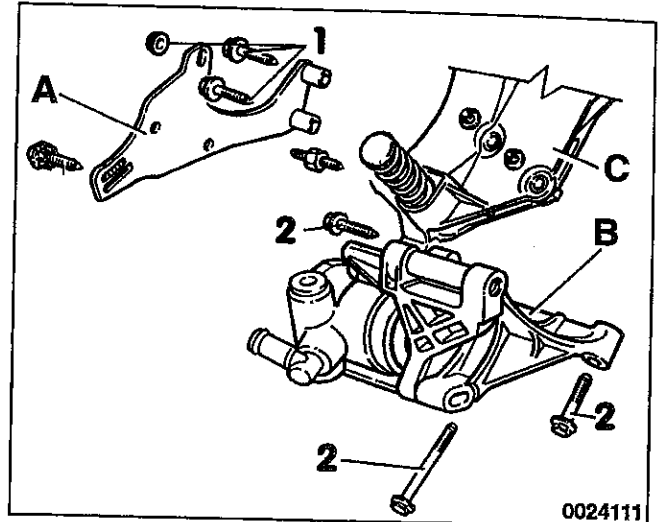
Power steering pump adjusting bracket (A), pivot bracket (B) and mounting bracket (C). To remove adjusting bracket remove bolts and nuts at 1. To remove pump and pivot bracket remove bolts at 2.
